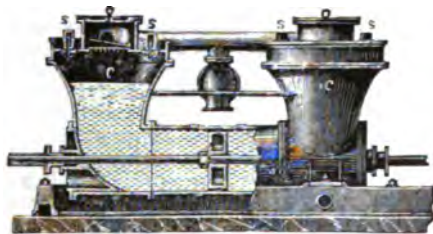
SECTIONAL VIEW OF HANARTE WATER COMPRESSOR.
